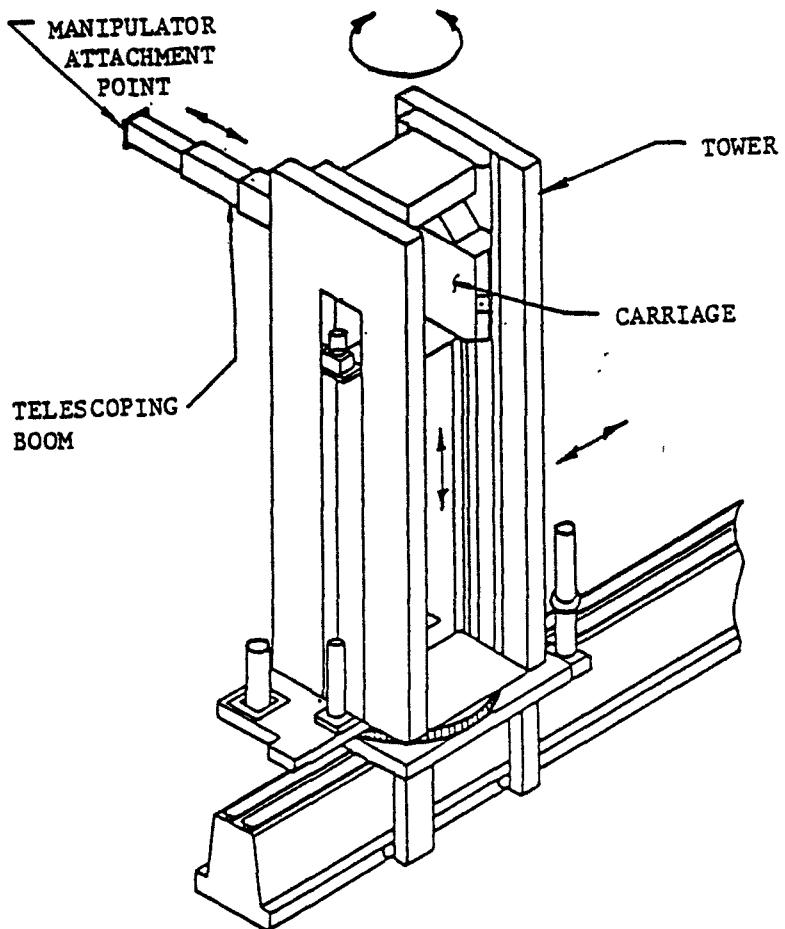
Floor-Mounted Trolley Transporter.
